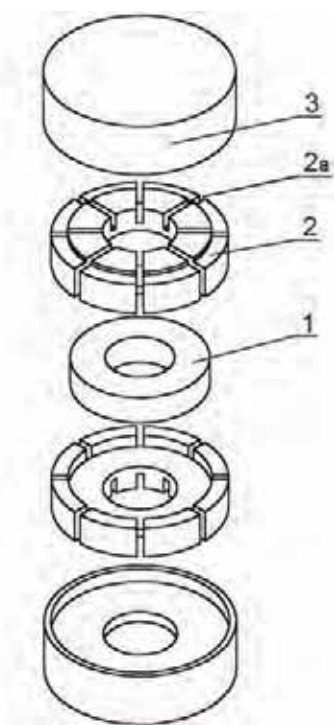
Schematic diagram of the device for applying the uniform compressive stress to the ring core [12]: 1 – investigated ring core, 2 – nonmagnetic cylindrical backing, 2a – grooves for windings, 3 – base backings
